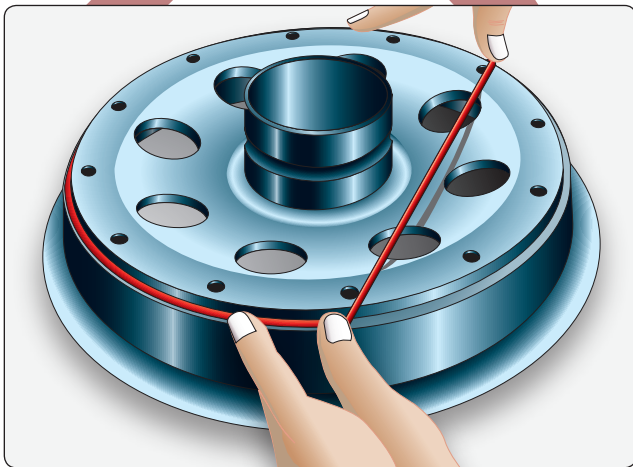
The wheel half O-ring for a tubeless tire wheel assembly must be in good condition and lubricated to seal for the entire life of the tire. The mating surfaces of the wheel halves must also be in good condition.
